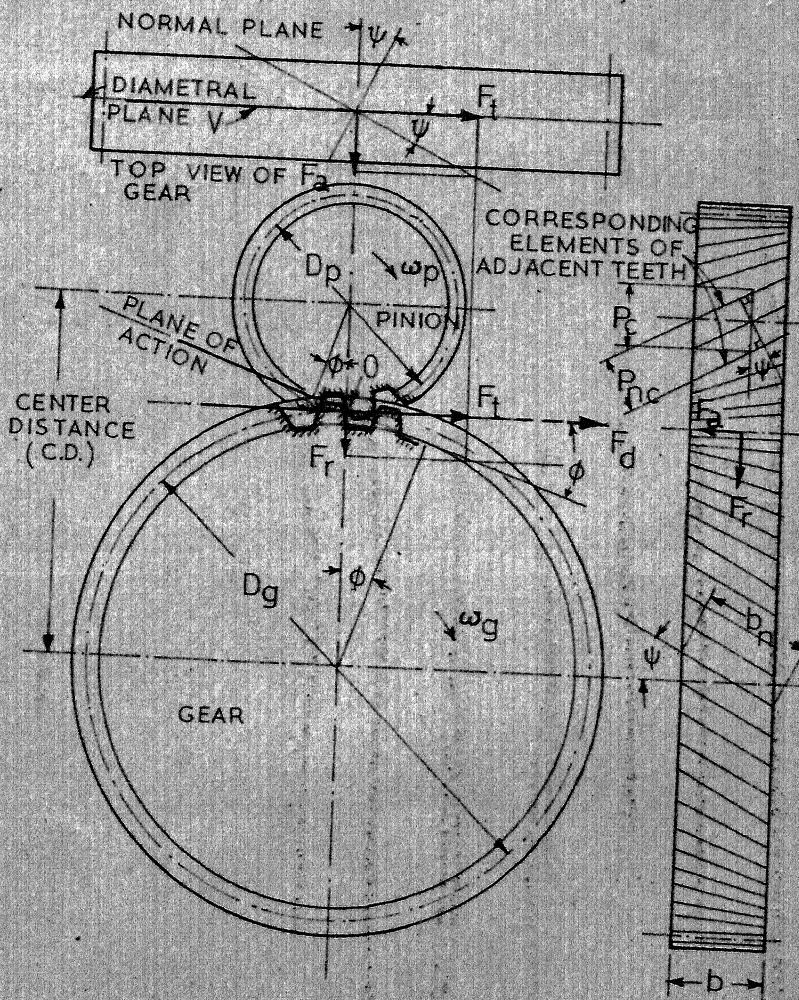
TYPICAL HELICAL GEARSET SHOWING
